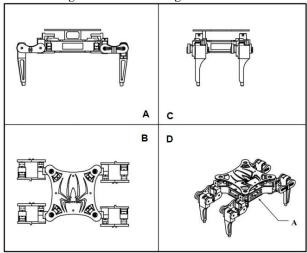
Quadruped Robot 1 Mechanical Design (Servo SG90): Front View (A), Top View (B), Left View (C), Isometric (D)
